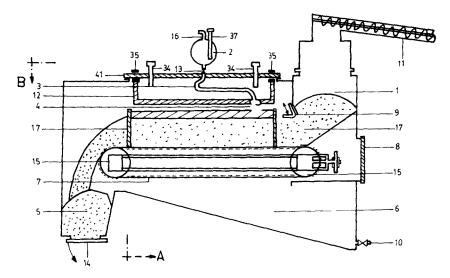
Front view of extractor. 1, feed; 2, solvent tank; 3, heated solvent feed pipe; 4, spray feeder; 5-14, meal discharge; 6, miscella; 7, conveyor; 8, man-hole; 9, level control; 10, product; 11, screw feeder; 12, feeder drive; 13, globe valve; 15, cylinder; 17, bed; 22, jacket; 34-37, thermometer; 35, disc; 41, cleaning valve.
